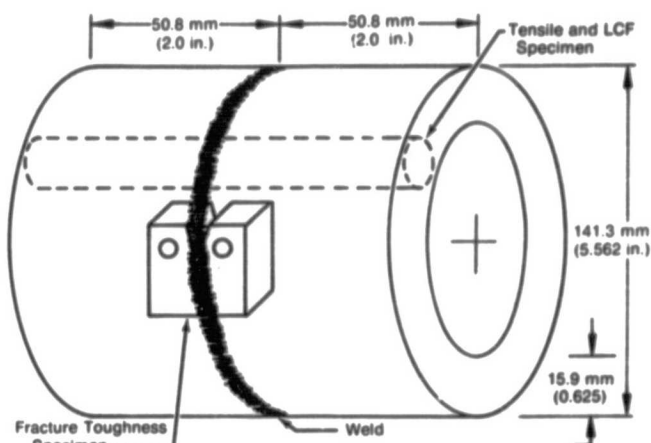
Pipe Weldment Showing Specimen Orientation
